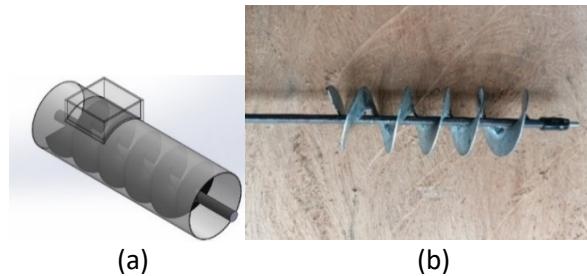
Comparison of auger designs: (a) CAD and (b) prototype.
